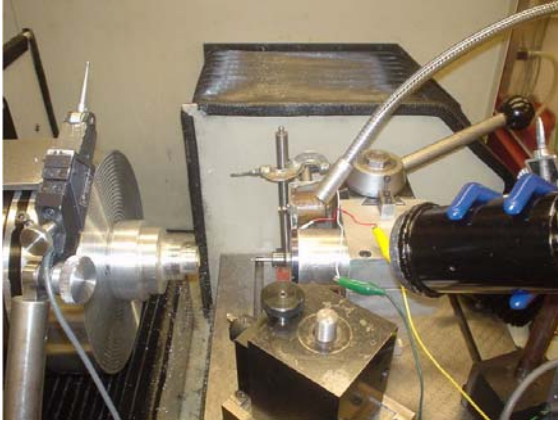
Tube mounting plate being faced. The plate is rotating on the spindle while material is being removed with the tool mounted on the micro-height adjuster. The boring spindle is in position in the lower right.
